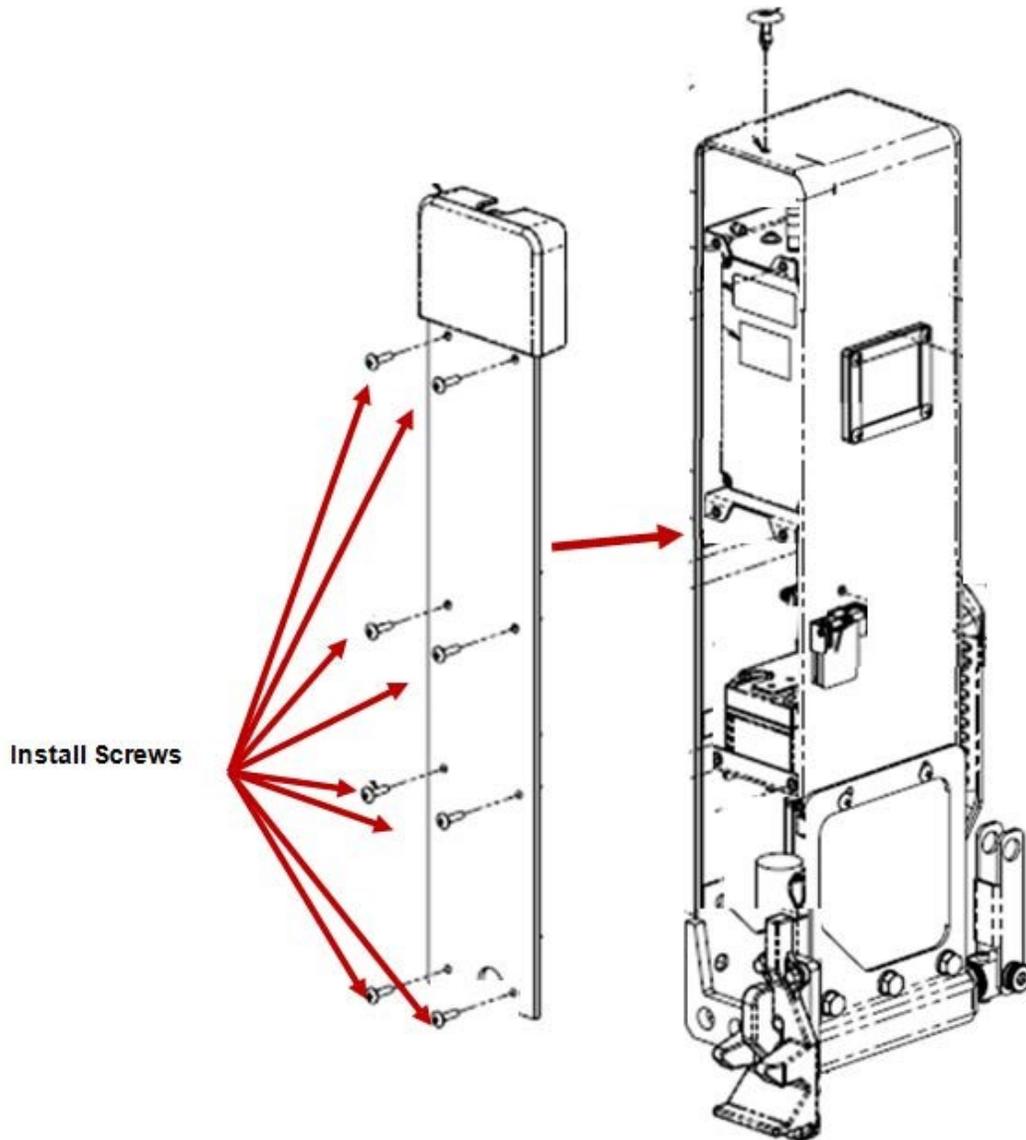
Reinstalling the EOT Chassis Rear Panel
